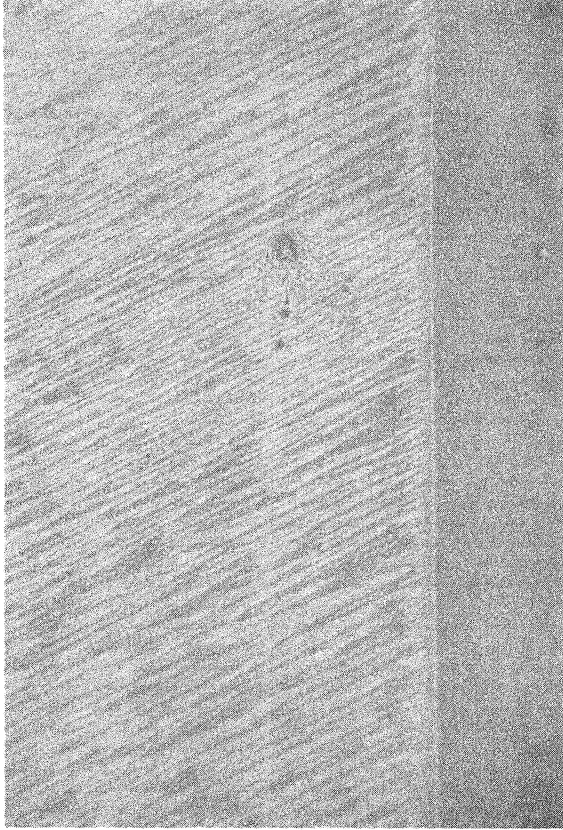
Crack Arrest Lines on Fracture Surfaces (200X)
